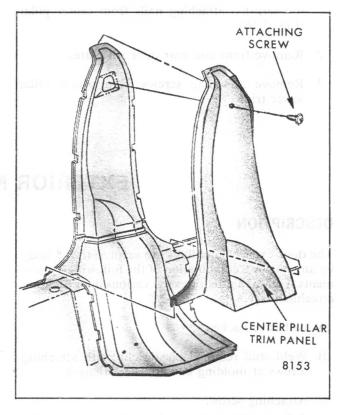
Center Pillar Trim Attachment Hardtop Styles
